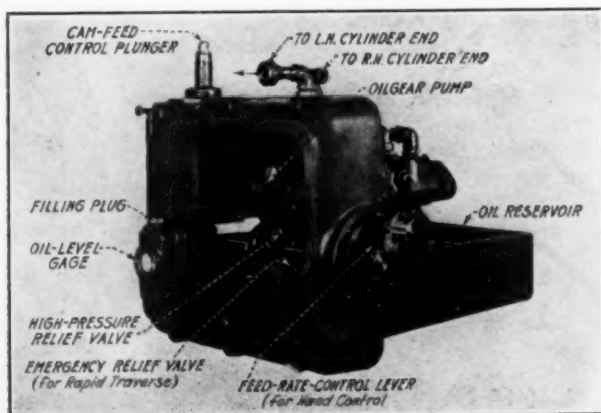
STANDARD HYDRAULIC-FEED UNIT, OUTSIDE VIEW
